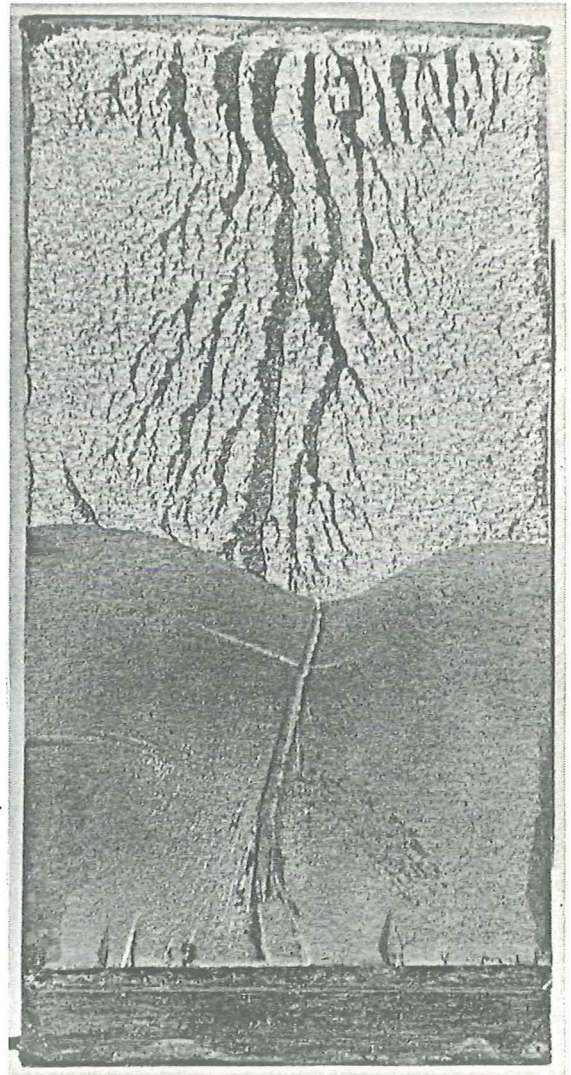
Crack surfaces of specimens 49-1 and 49-2.
